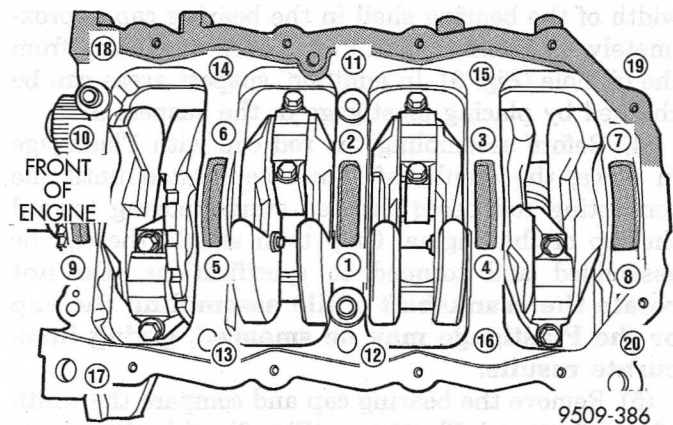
Main Bearing Caps/Bedplate Torque Sequence
